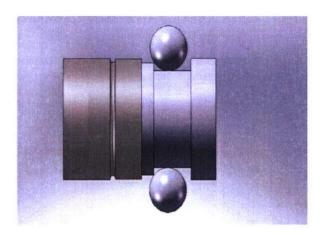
Assembled obturator, steel washer, and plastic piece engaged by ball bearings
